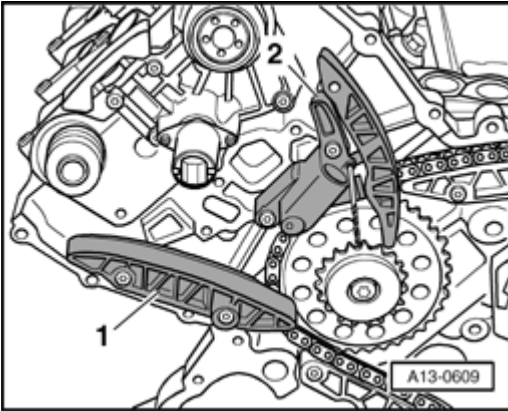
Removing Glide Track At Left Cylinder Head & Chain Tensioner
